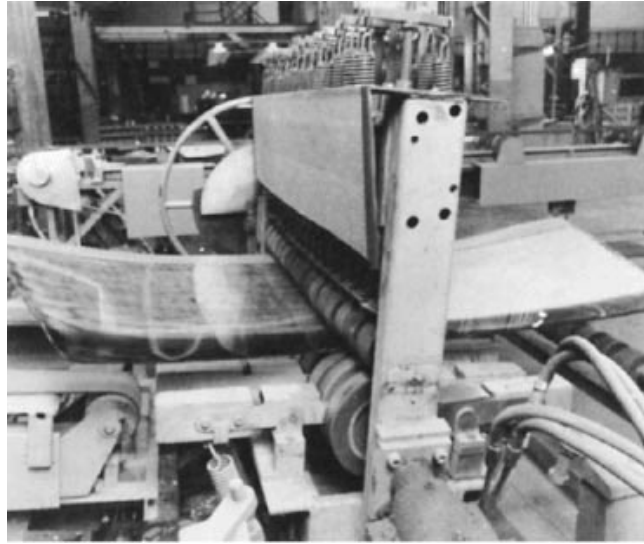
The glass and vinyl “sandwich” is fed through a special de-air machine to remove trapped air and increase the adhesion of the vinyl to the glass.(Courtesy of Ford Motor Co.)
